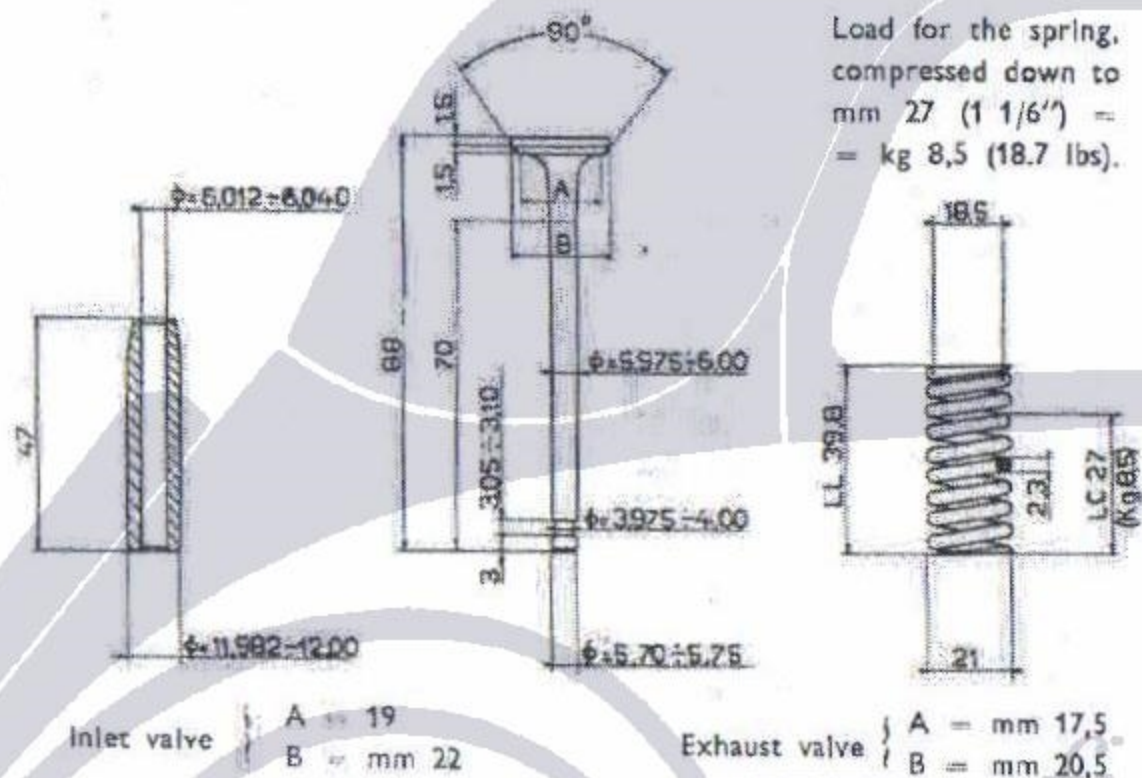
Main data concerning the valves, valve guides and valve springs.
